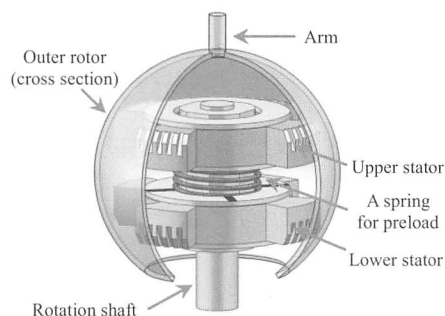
Assembly and component parts of SUSM in sandwich structure.
